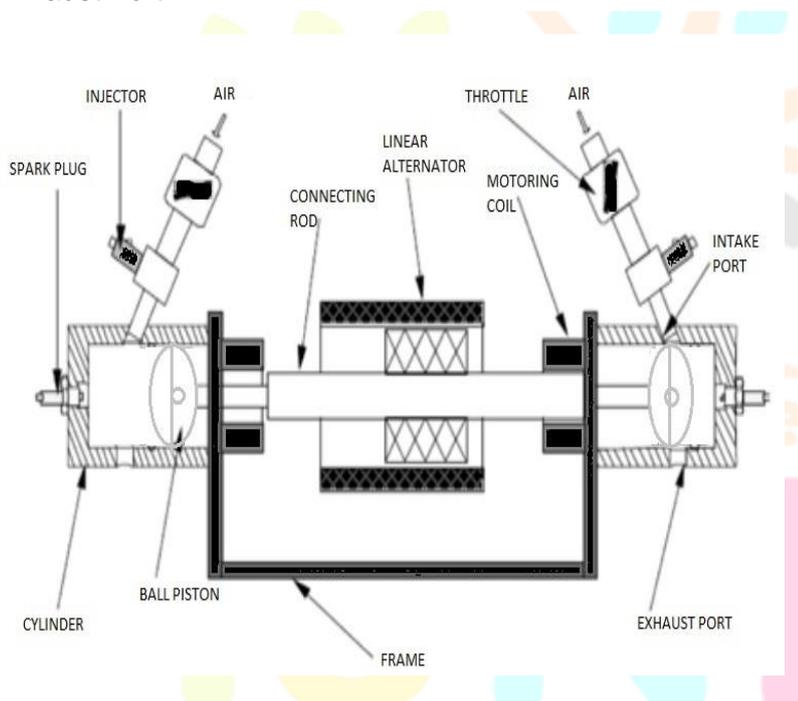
COMPONENTS OF A SPHERICAL BALL FREE PISTON ENGINE
